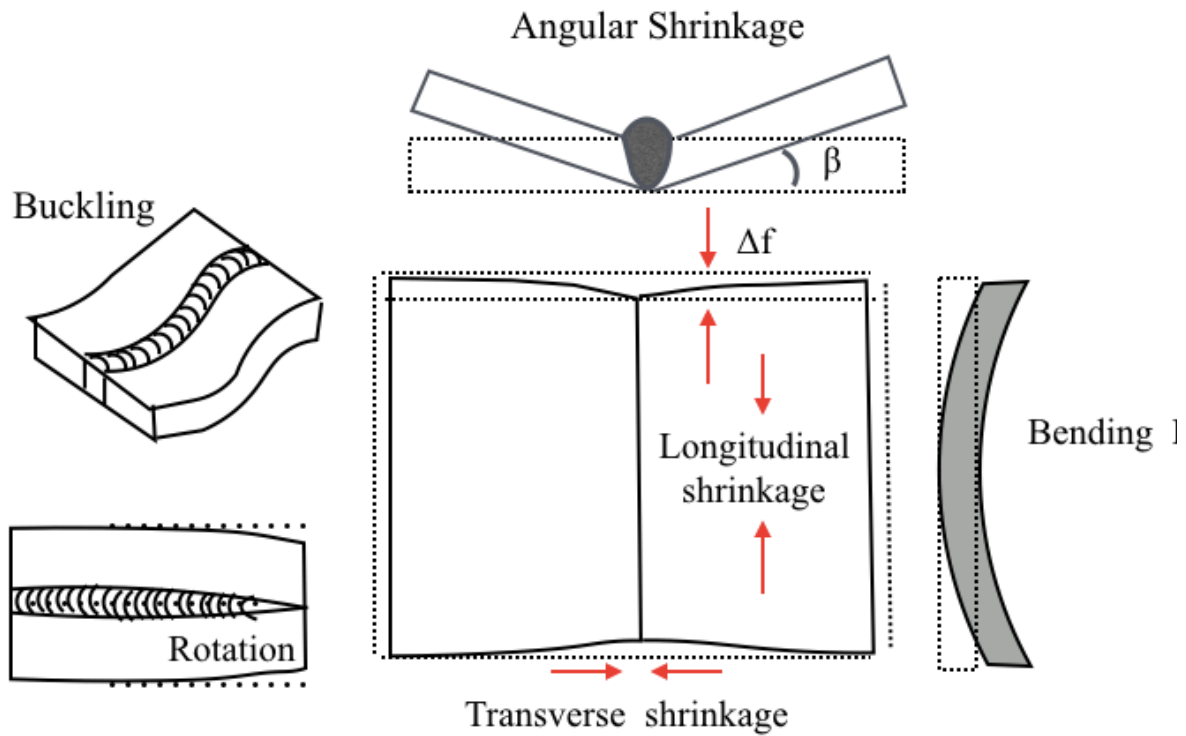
different types of welding distortion (John A. Goldak 2005)
